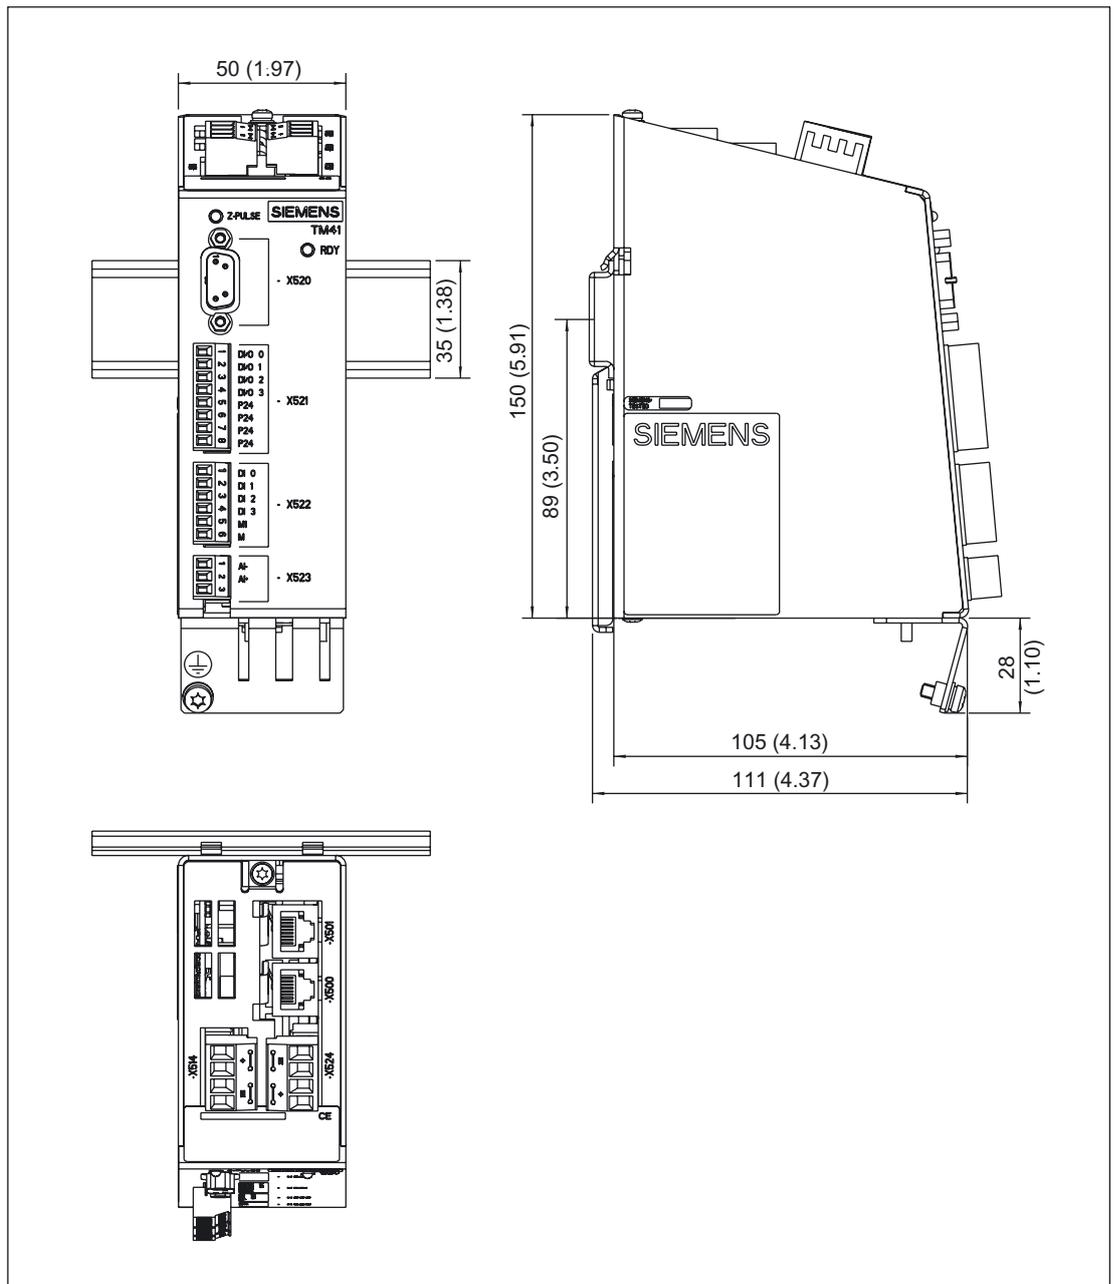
Dimension drawing TM41, Order number 6SL3055-0AA00-3PA0
